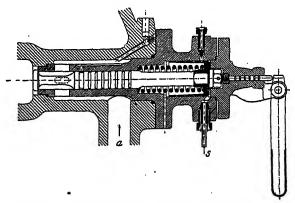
Starting Air Valve of M.A.N. Horizontal Engine.
